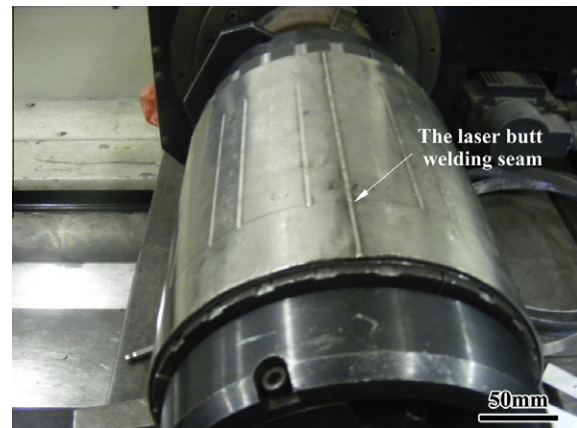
The cylinder piece photo after the completion of laser penetration welding and butt welding.
